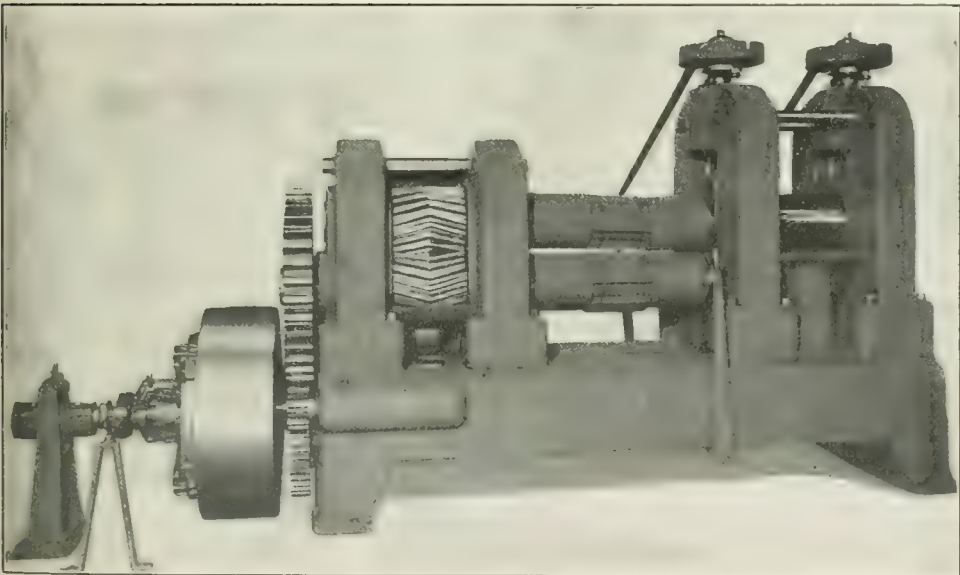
The Mill Arranged for Belt Drive with a Friction Clutch.
